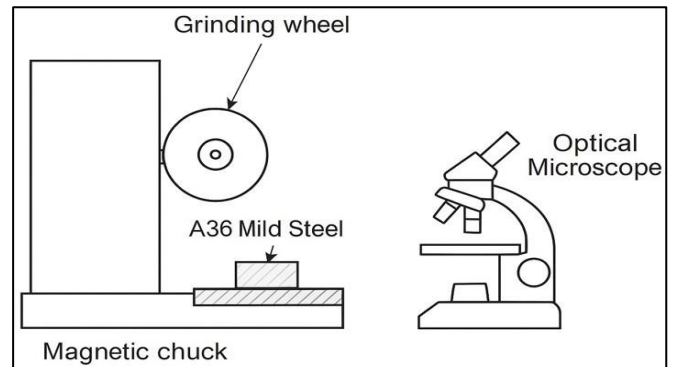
Schematic Diagram of the Experimental Setup: Grinding Wheel, A36 Workpiece on Magnetic Chuck, and Optical Microscope for Surface Measurement.
